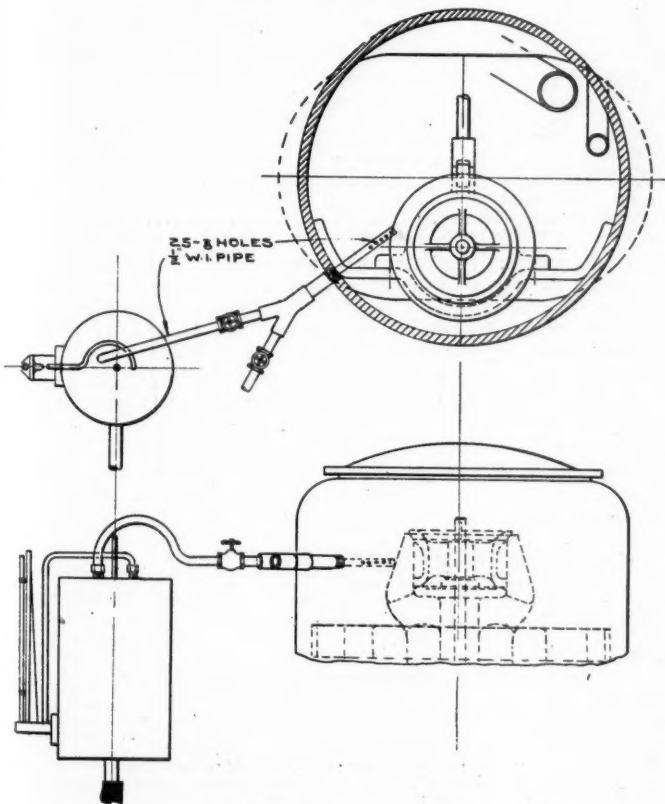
Location of Sampling Pipe for Steam Calorimeter
